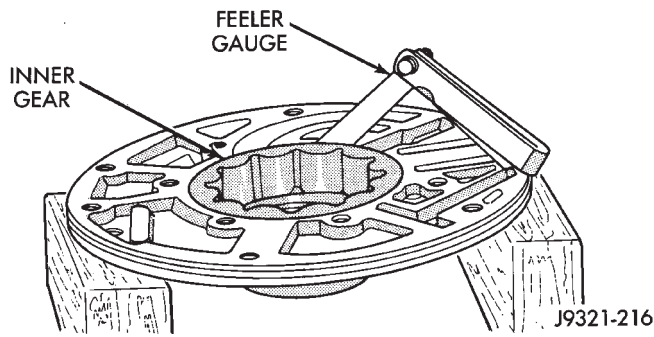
Measuring Pump Housing-To-Inner Gear Clearances
